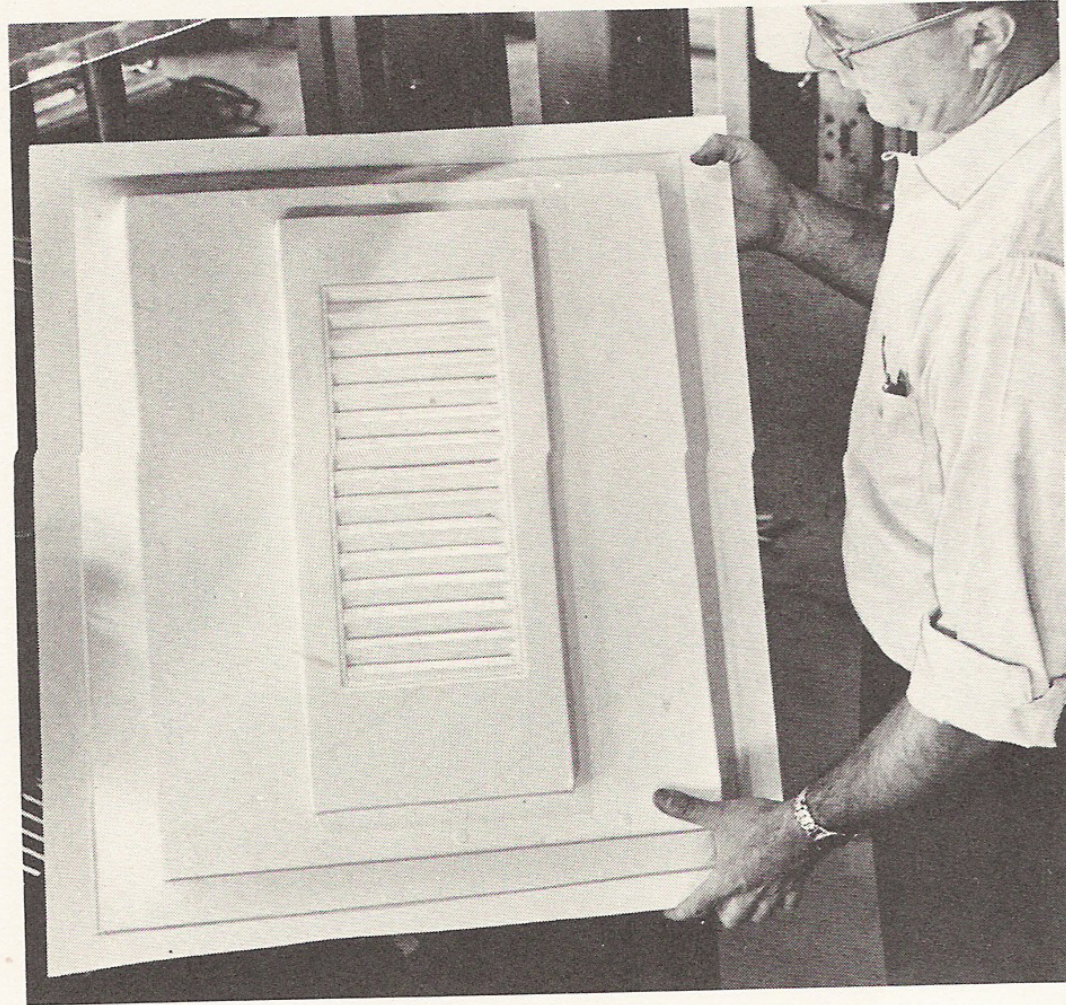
The frame has been unclamped and the formed sheet is being removed from the mold.
